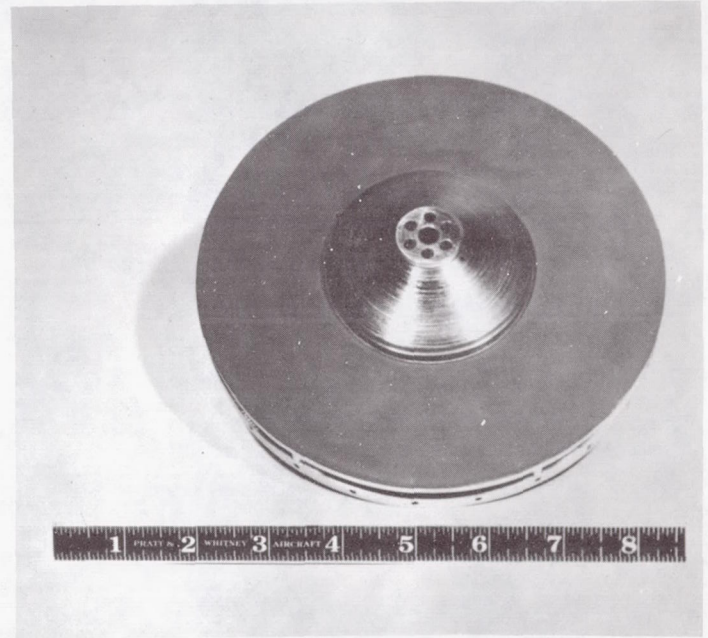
Turbine Wheel at Assembly, Trailing Edge (CN-9289)
